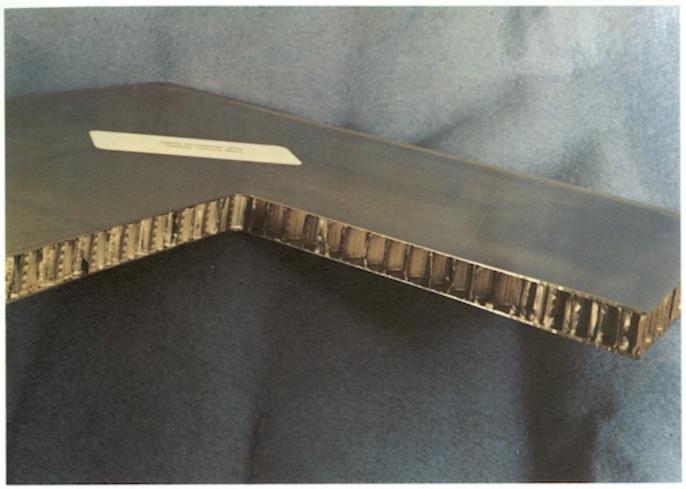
F. Tapered and Formed Welded Honeycomb Sandwich Panel
